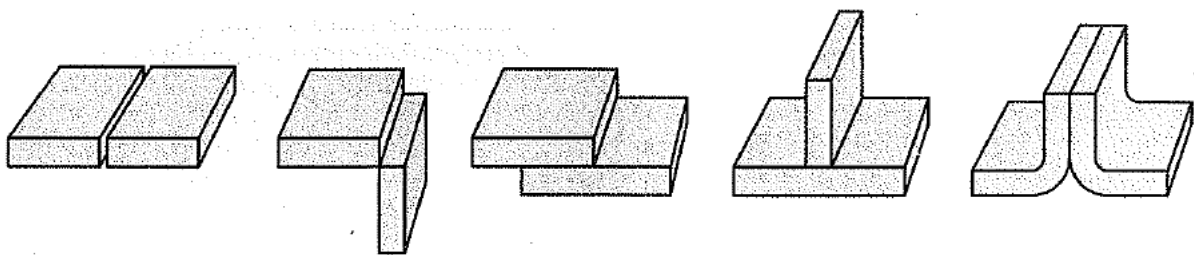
Types of weld joints: Butt, Corner, Lap, Tee and Edge[12]
